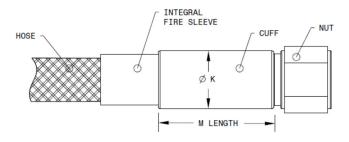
INTEGRAL FIRESLEEVE CUFF DIMENSIONS - SEE TABLE 7 /28/
